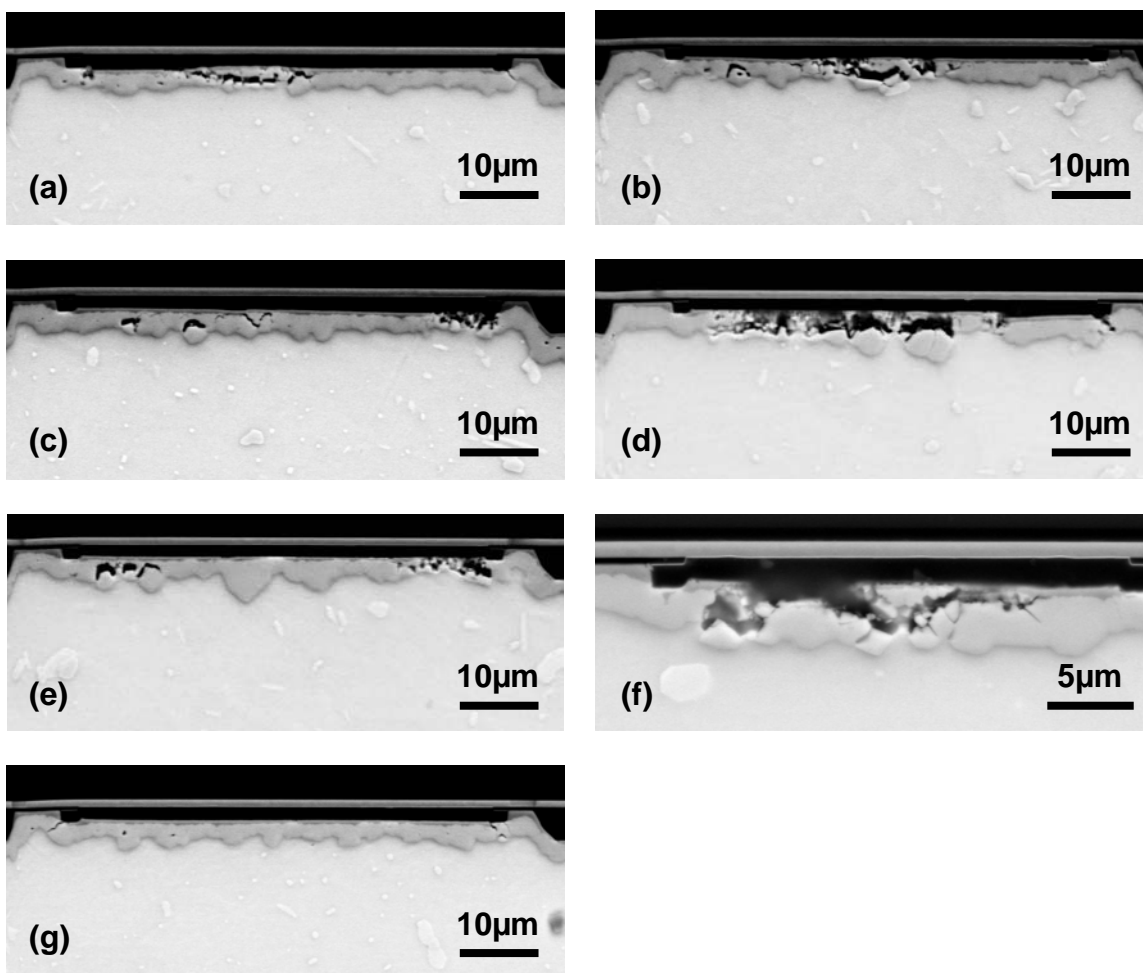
Solder joints with Ni UBM in Sample B after 138 days of TM stressing. (a)-(f) show 6 solder joints with voids. The other 21 solder joints under TM stressing only had no voids as shown in (g).
